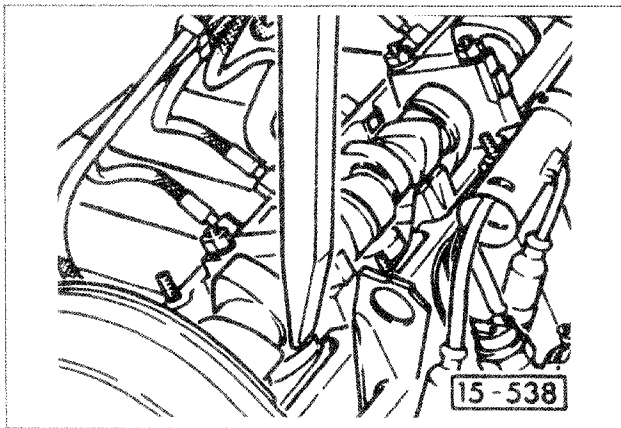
Hydraulic cam follower being checked with a non-metal object.
